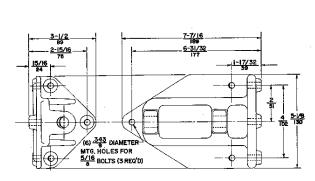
Swivel Attachment Detail Dimensions in. mm
